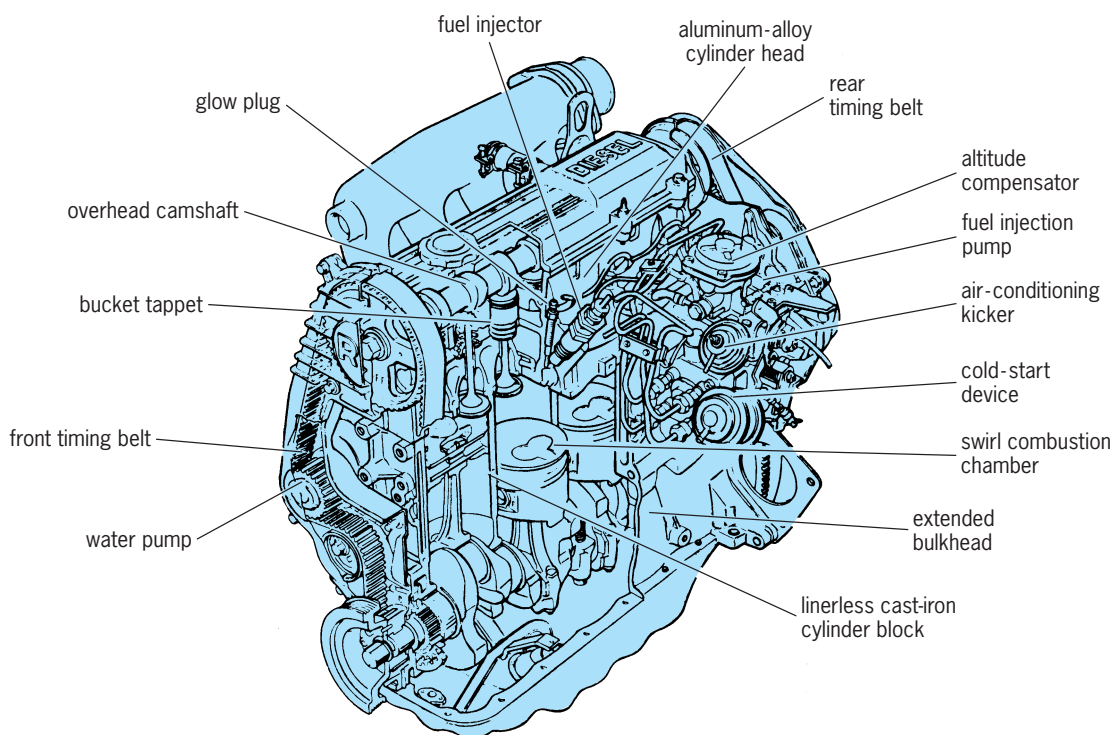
A 2.0-liter, four-cylinder, four-stroke-cycle passenger-car diesel engine which has a distributor-type injection pump and indirect injection. (Ford Motor Co.)
